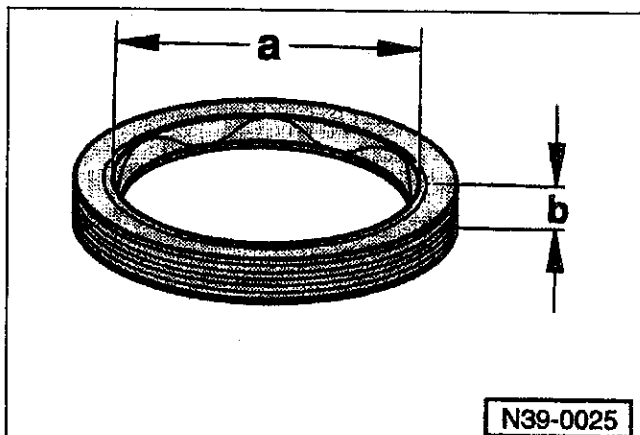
Drive flange oil seal for 02A transmission with drive flange springs.
